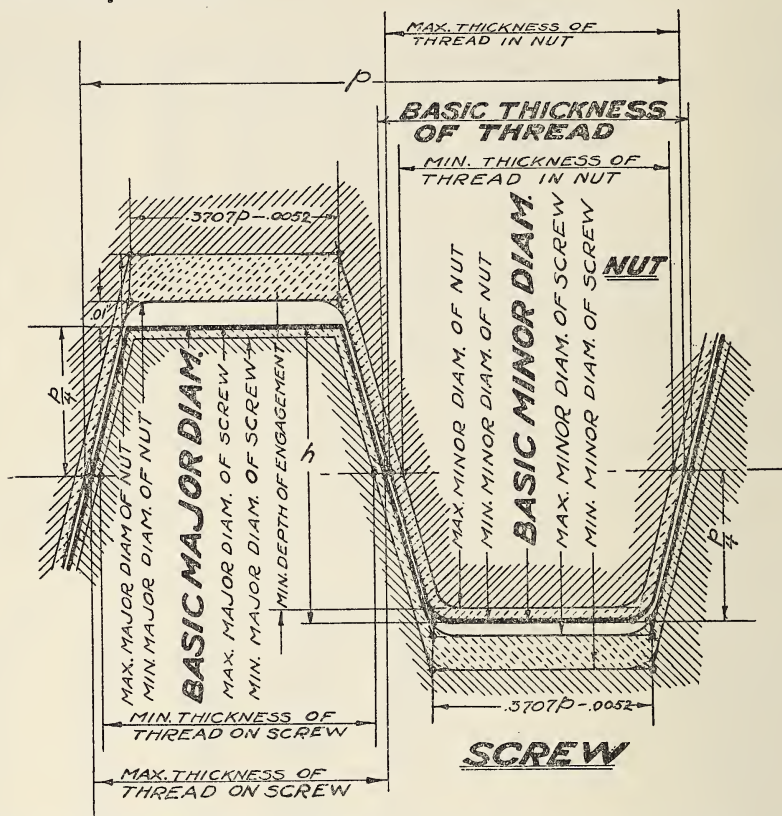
Illustration of allowances, tolerances, and crest clearances, Acme threads.
